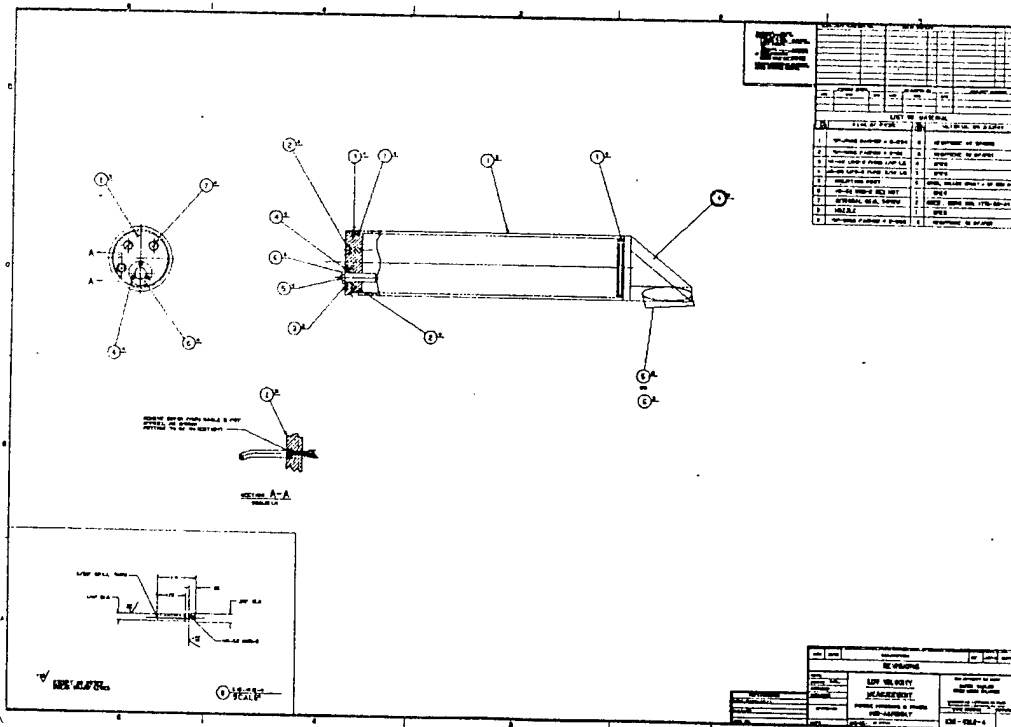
Probe Assembly and Nozzle Detail Drawing
